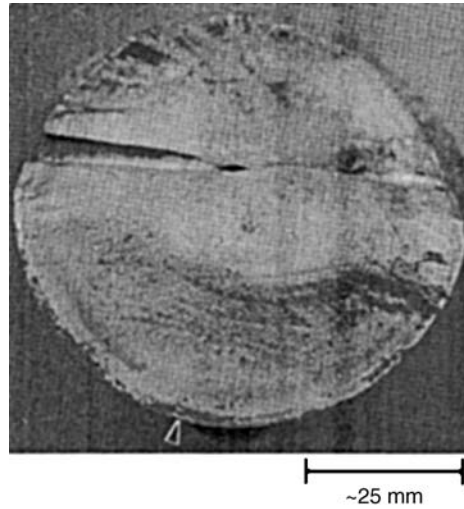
Fatigue fracture surface appearance of a failed crankshaft, showing 'beach marks' on the lower part. The origin of the primary fracture is indicated by the arrow. (Reprinted with permission from ASM International. All rights reserved www.asminternational.org)
